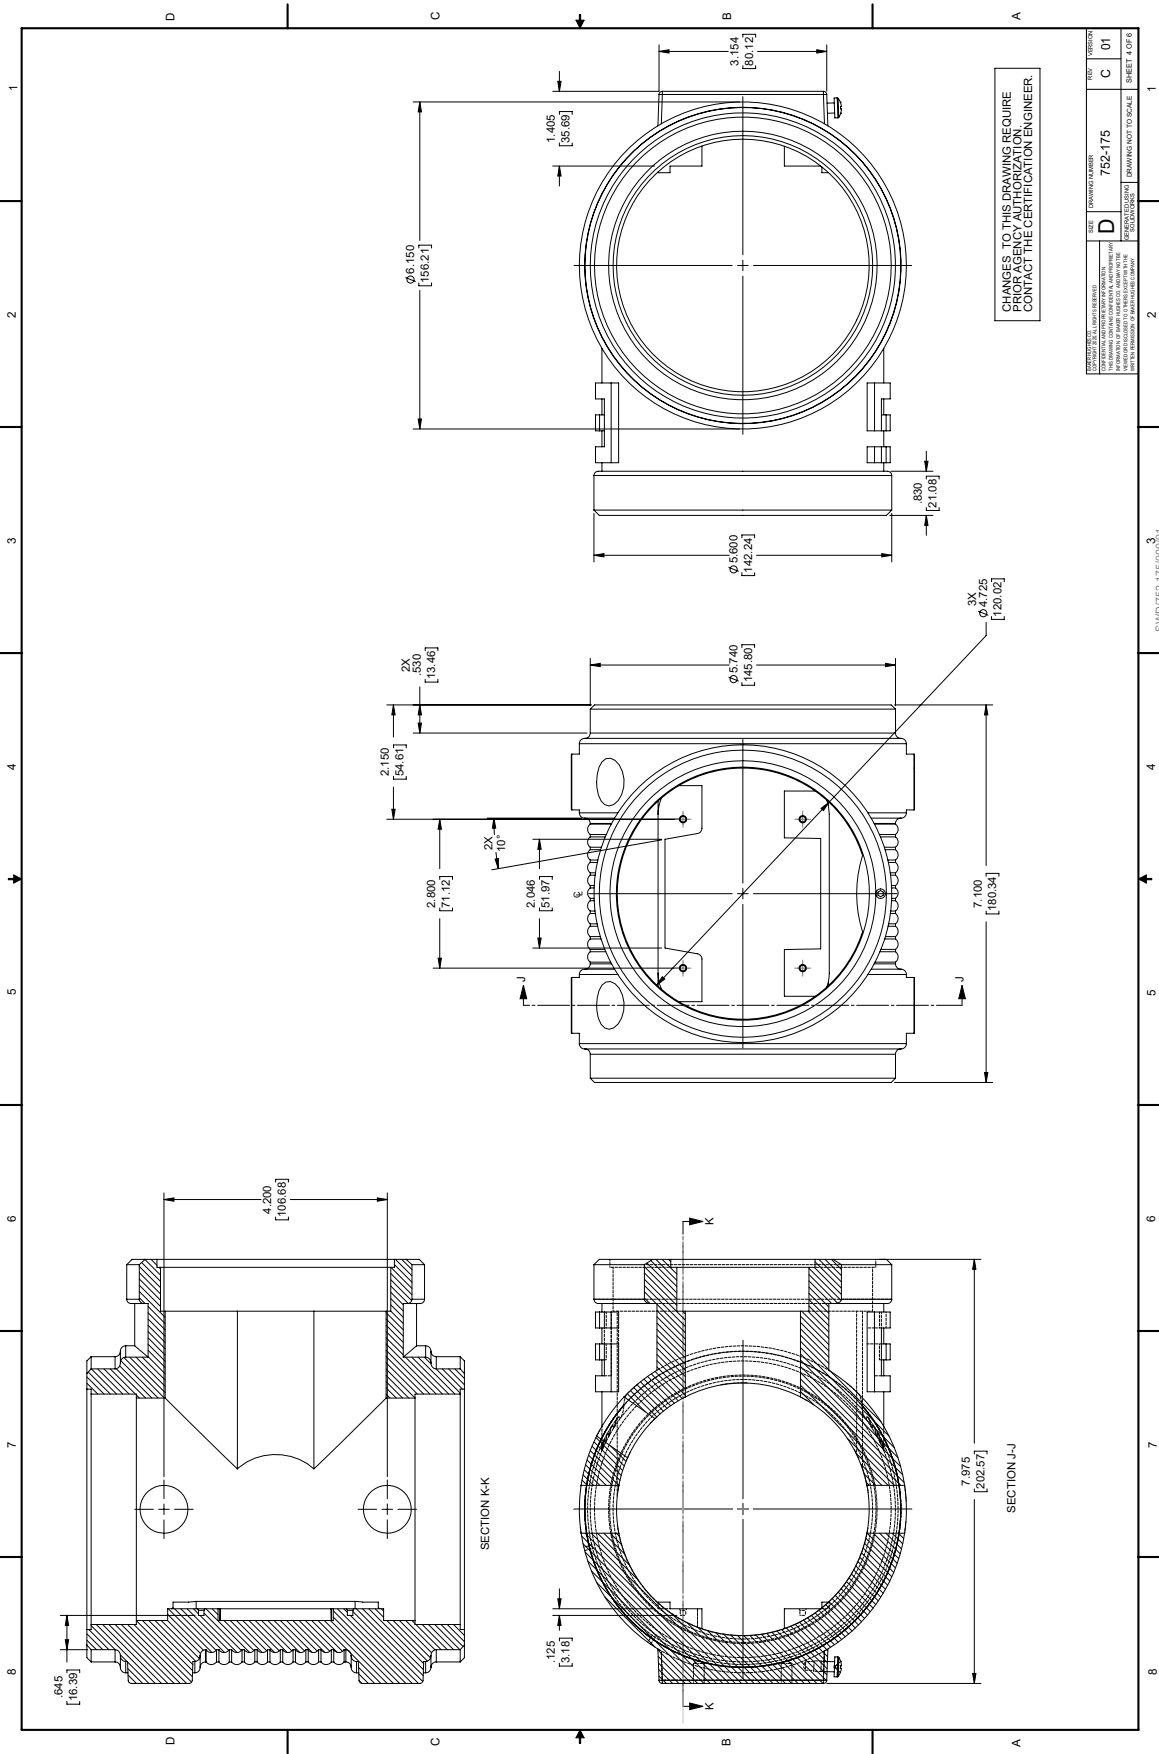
XDP Certification drawing, Cenelec (752-175revA, sheet 4 of 6)
